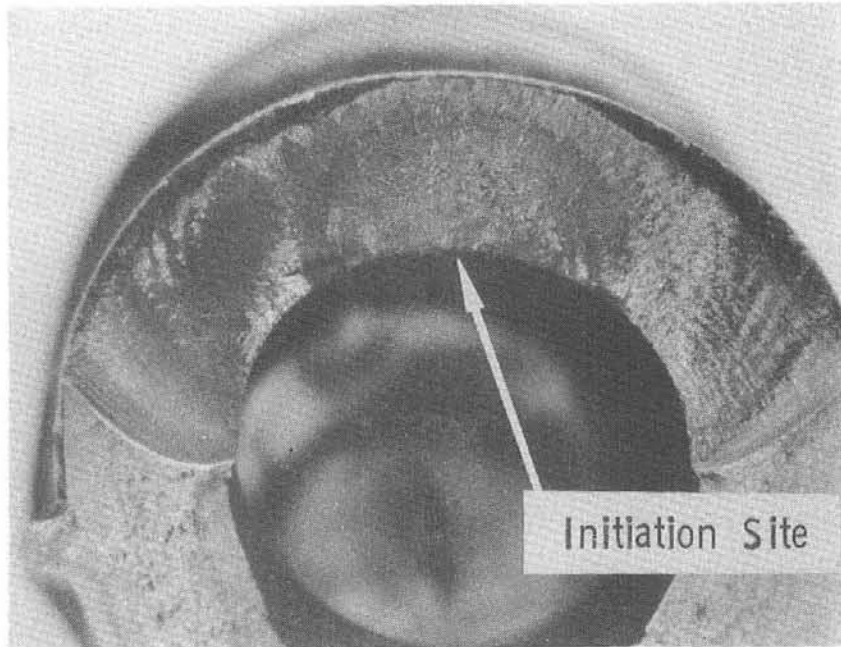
Photograph of the cross-section of one of the edge tube bends removed from a panel. The crack initiation site is on the tube inside surface.
